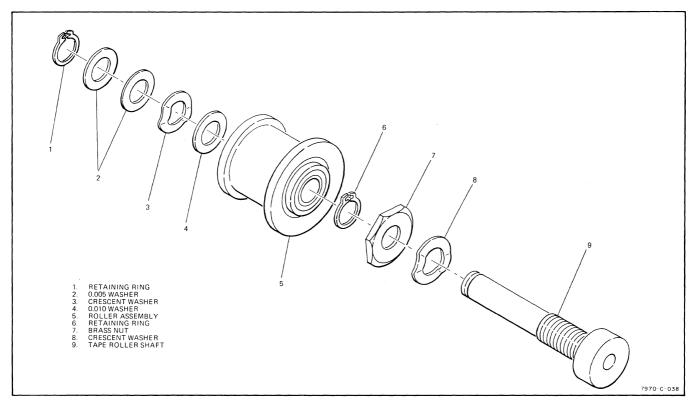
Tape Roller and Bearing Assembly, Exploded View
